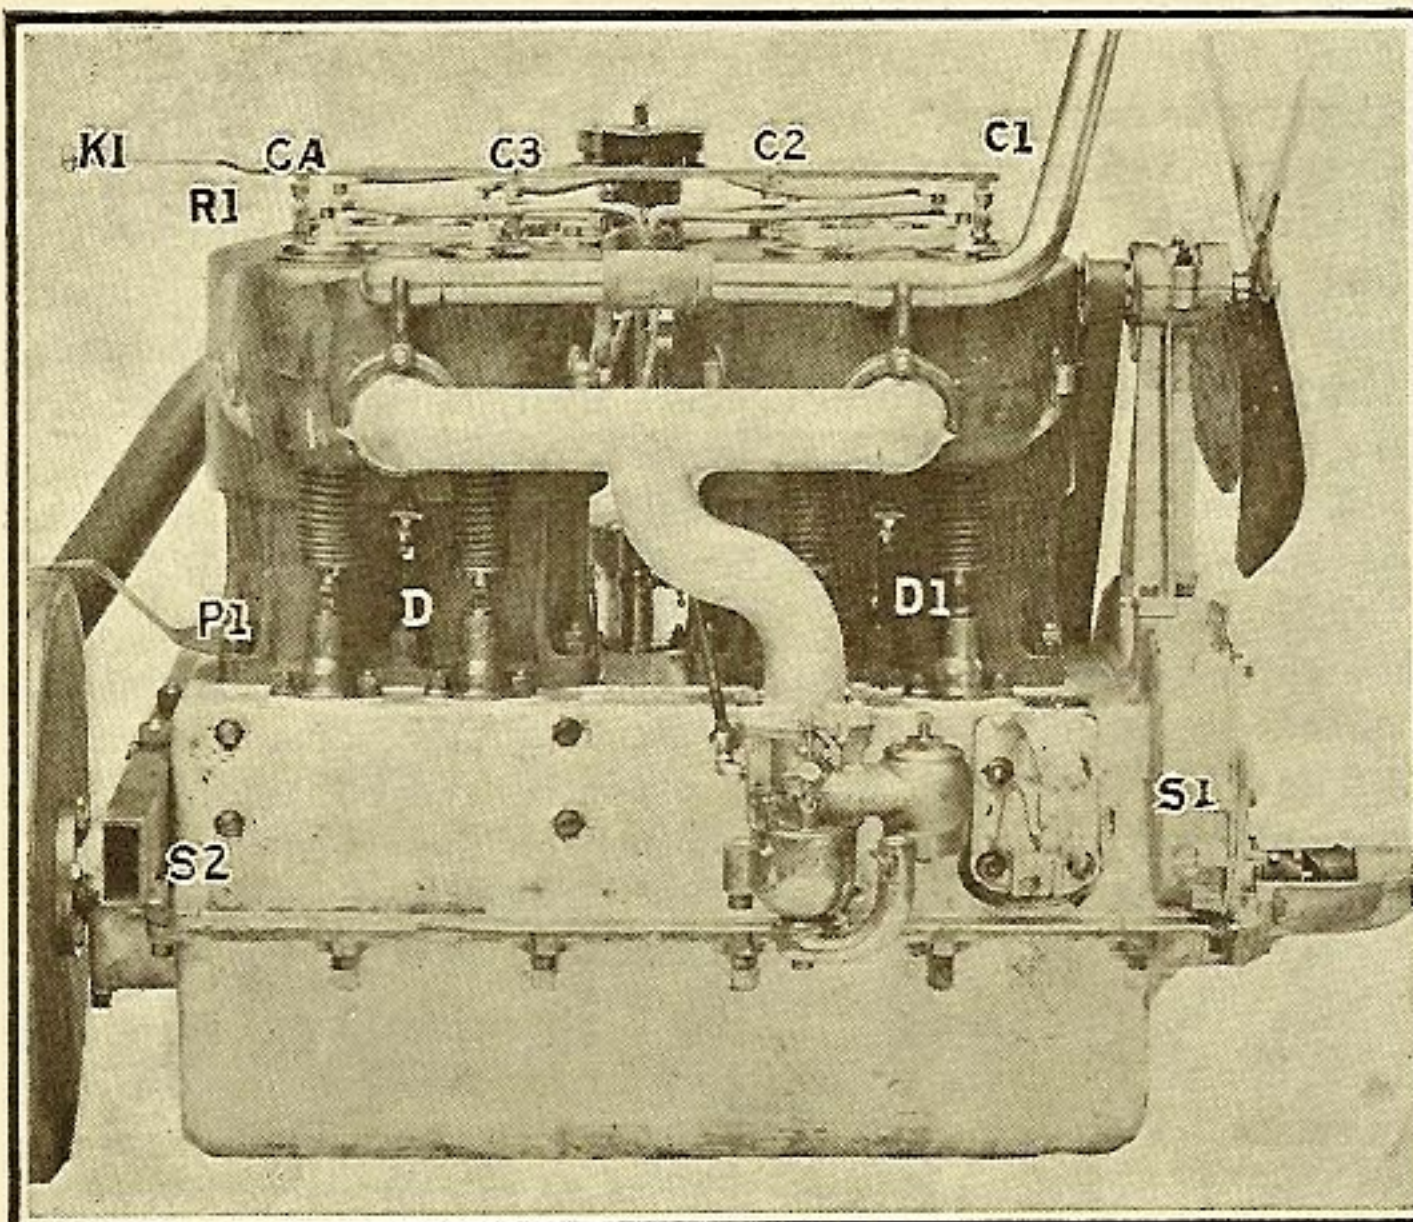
Intake side of motor, showing substantial supporting members, carbureter and cocks to drain water from jackets
